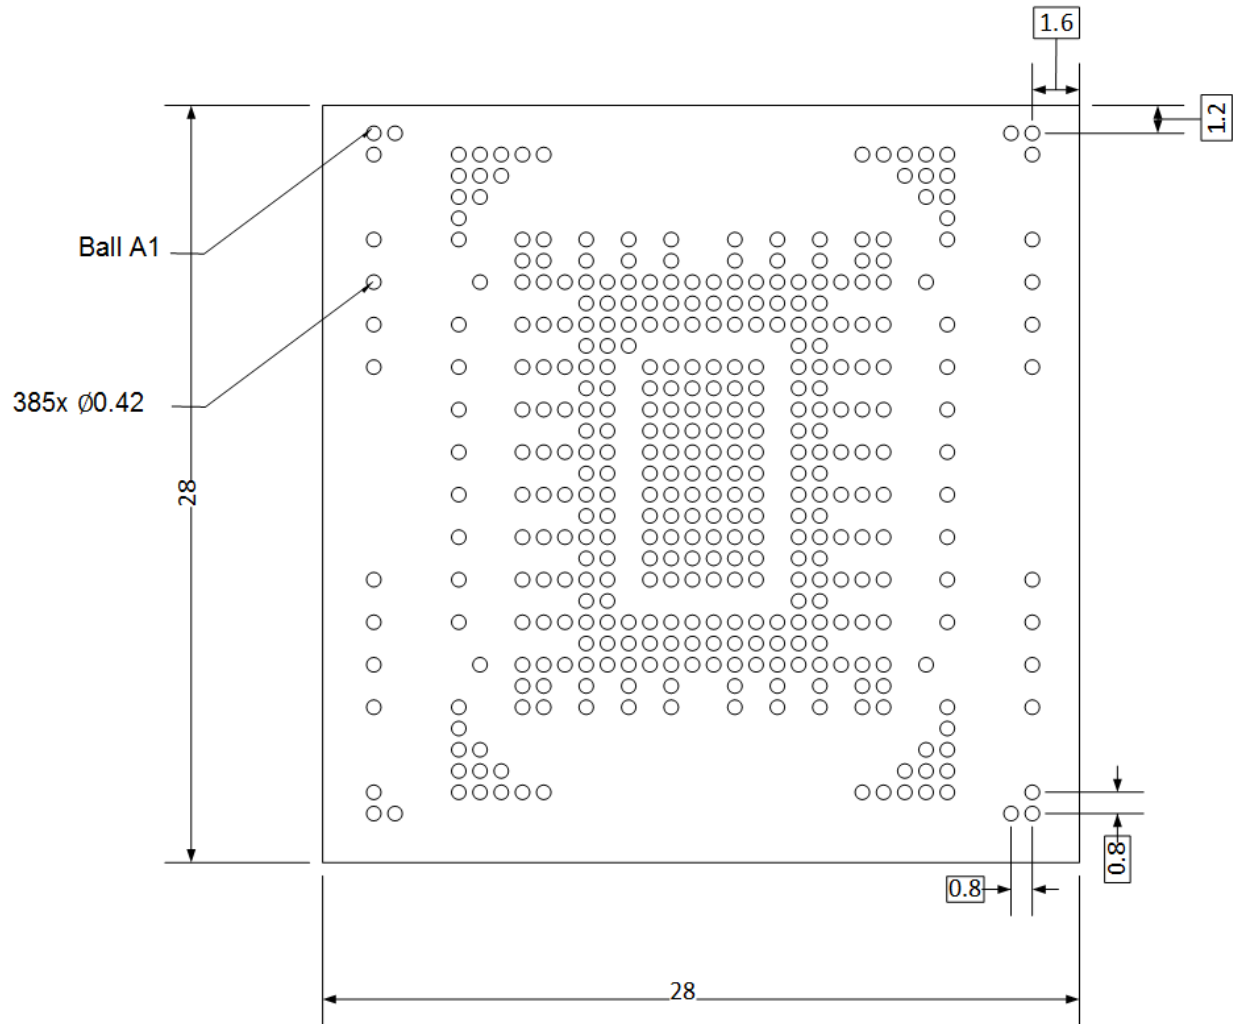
Recommended Land Pattern for M.2 Type 2828 BGA (Top View)
